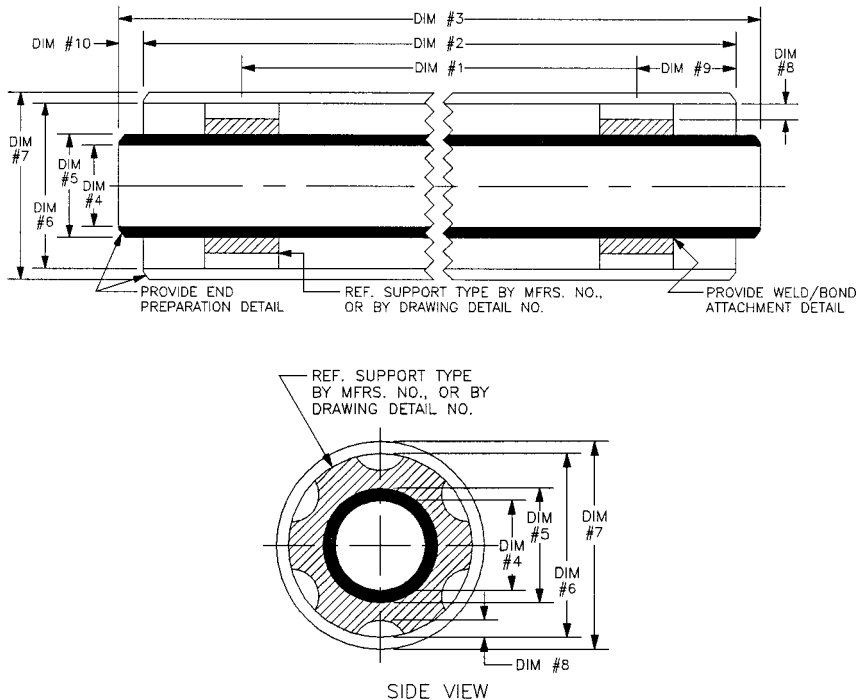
Typical layout details for a straight pipe section of double containment piping. (From "Handbook of Double Containment Piping Systems," C. Ziu, McGraw-Hill, New York, 1995.)
